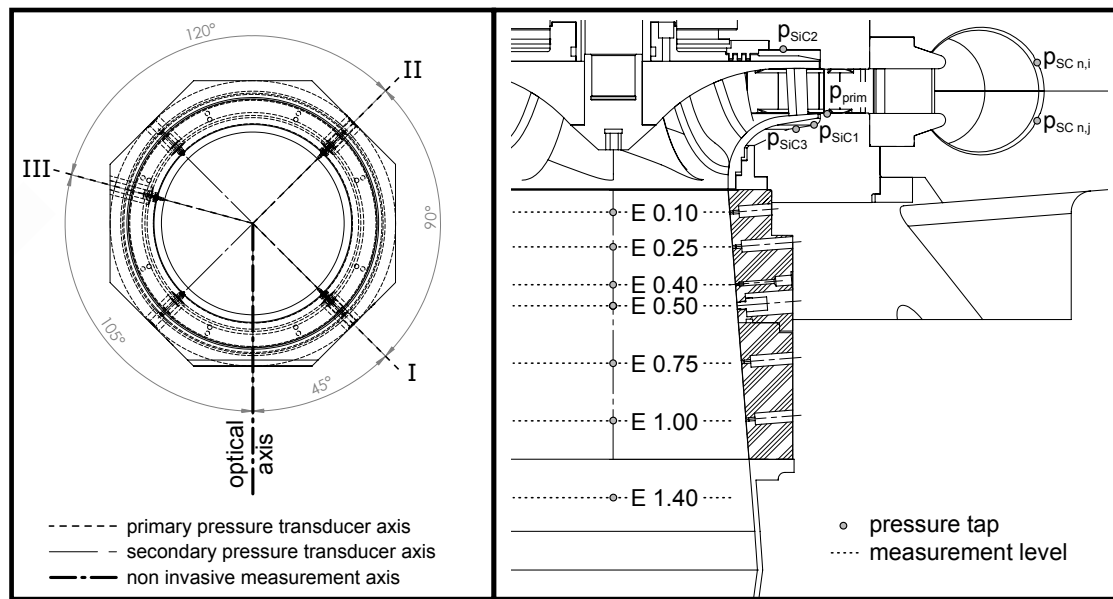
top view of draft tube cone 1 and measurement axis (left); cross section of radial model pump-turbine with pressure taps (right)
